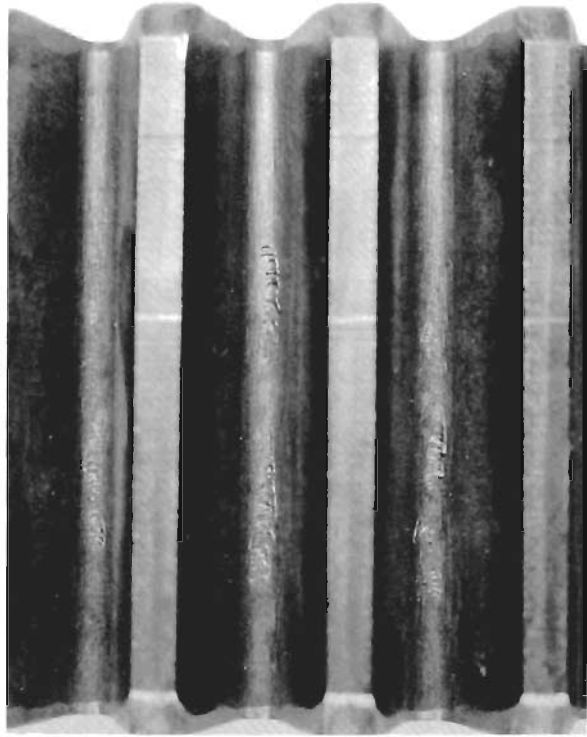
A tooth space inductor set too close to the root caused severe burning and melted material at the root centers of several teeth.
